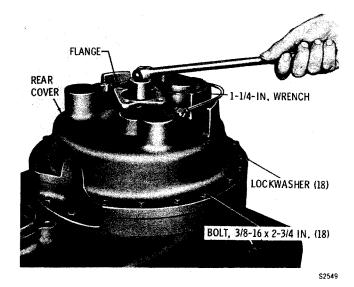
Removing power takeoff flange nut (TTB 2221-1, 2421-1 with converter-driven PTO)
